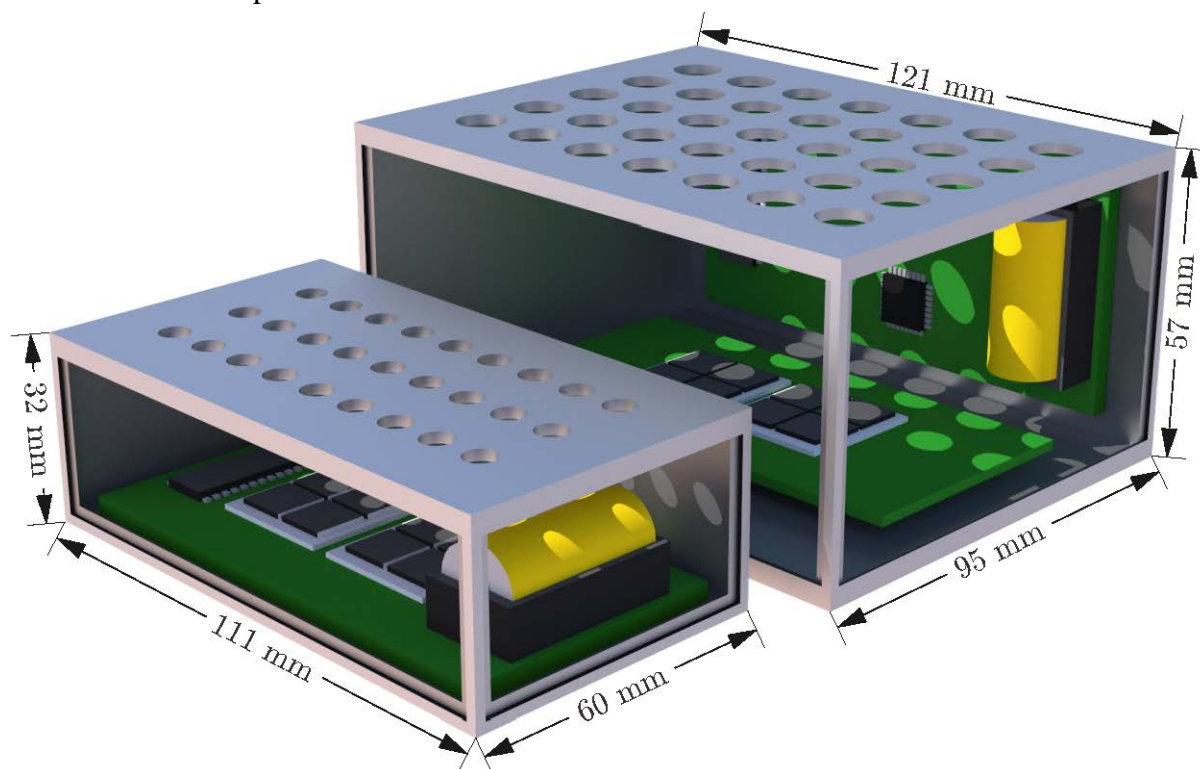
Rendered CAD drawing of both geometries showing size and PCB position differences. In final setup the side walls are complete, and the top inlets are covered with a filter.
